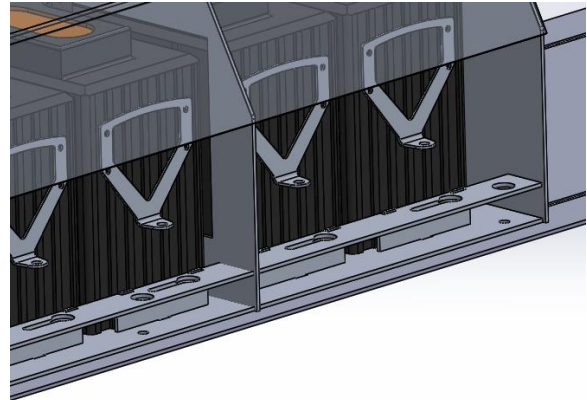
Slots and tabs are used for easy assembly and welding.
